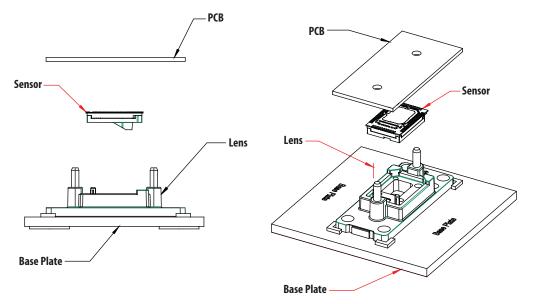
Exploded view drawing of ADNS-7630 sensor coupled with ADNS-7100-001 lens, PCB & base plate (front view and top side view)
